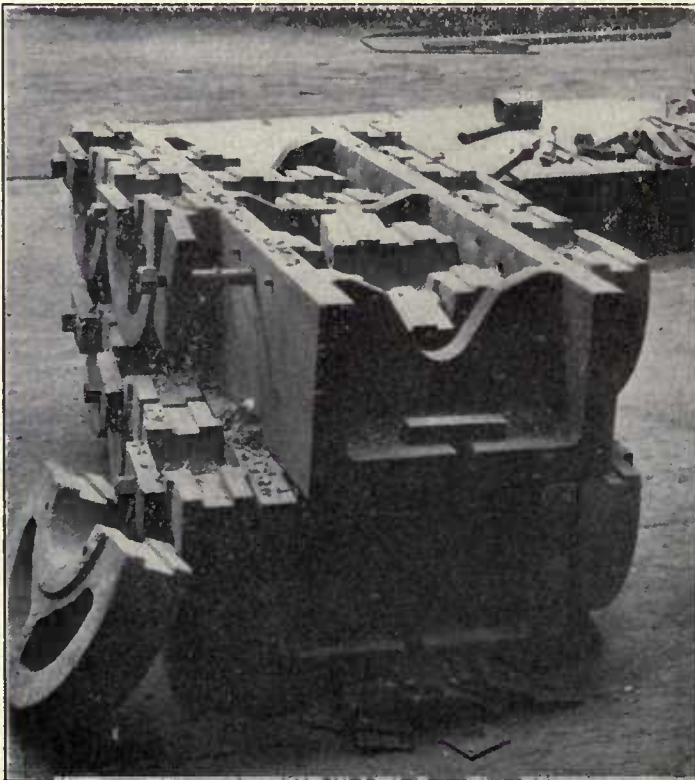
Jigs for Planing and Drilling Eccentrics.
